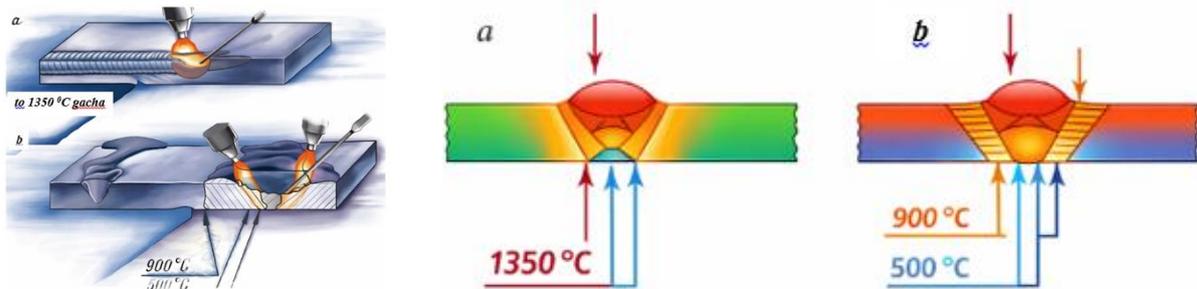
Corrosion in weld seams: a — knife-line attack; b — intergranular corrosion.
